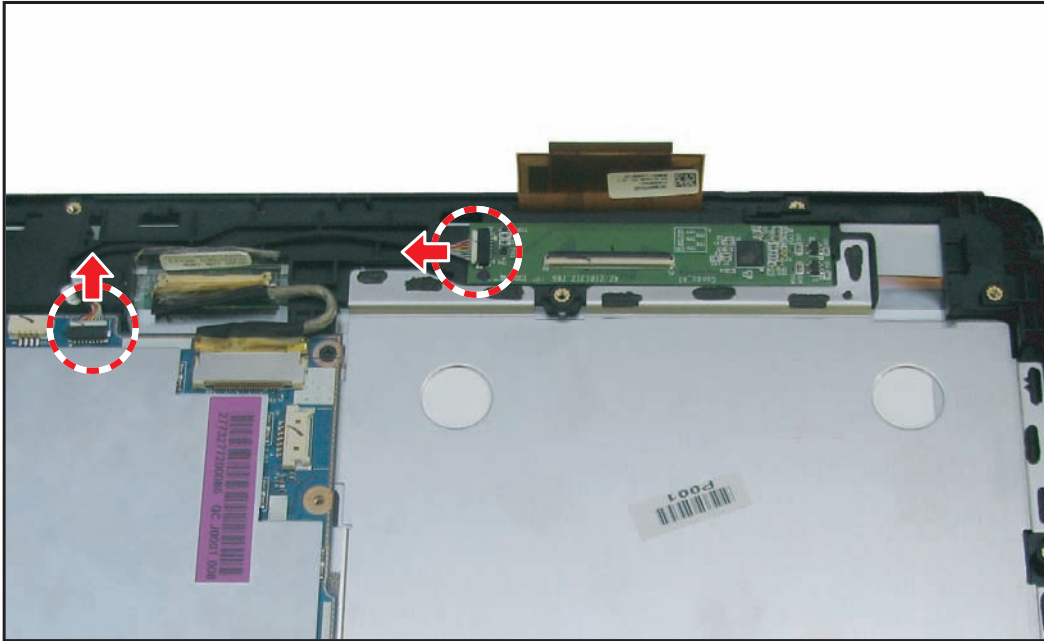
Disconnecting the Touch Panel Control Cable Connectors
